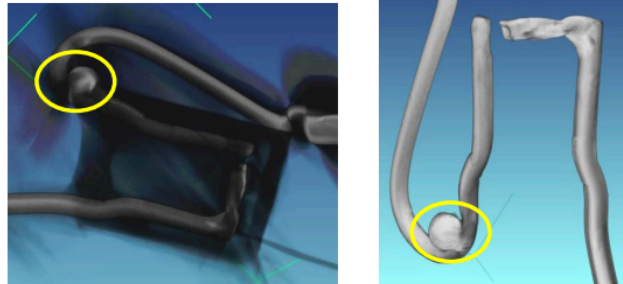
CT scans of the TCO showing the solder bead (Sub 64)
